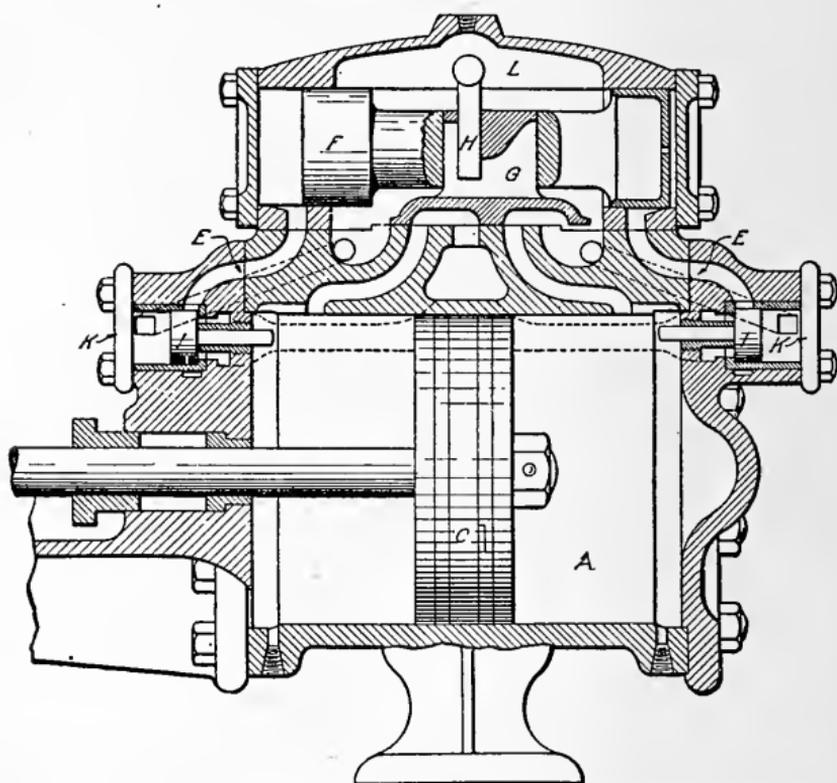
Section of Pump Cylinder Showing Valve Operated with Tappet
